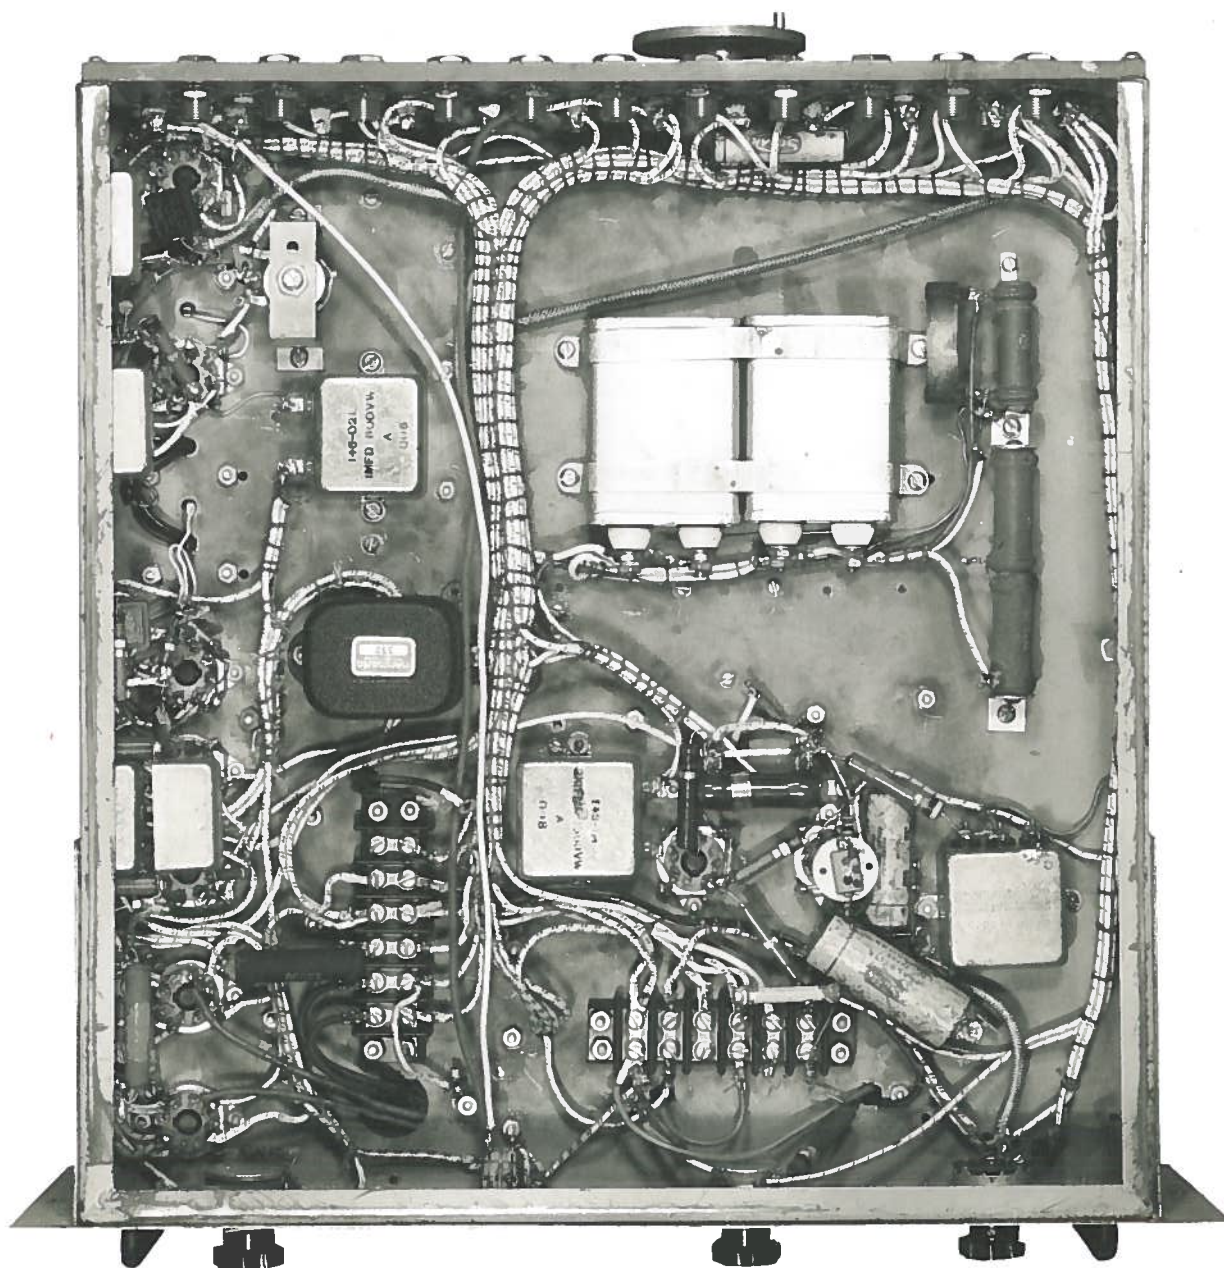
UNIT B - RECEIVER AND MOTOR CONTROL
